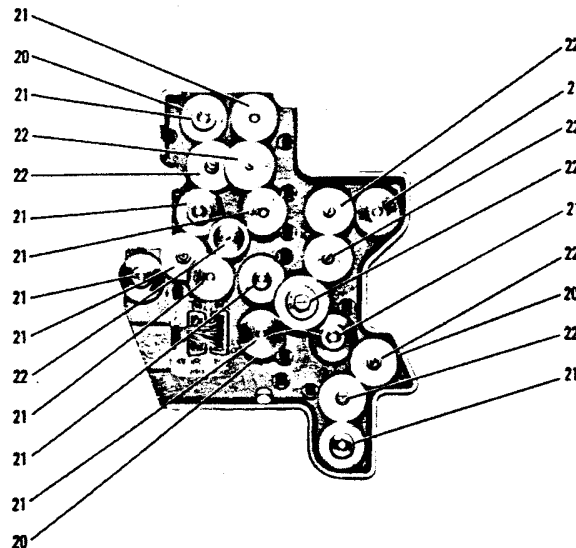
Receiver-Transmitter Main Chassis Gear Plate, Lubrication Points
